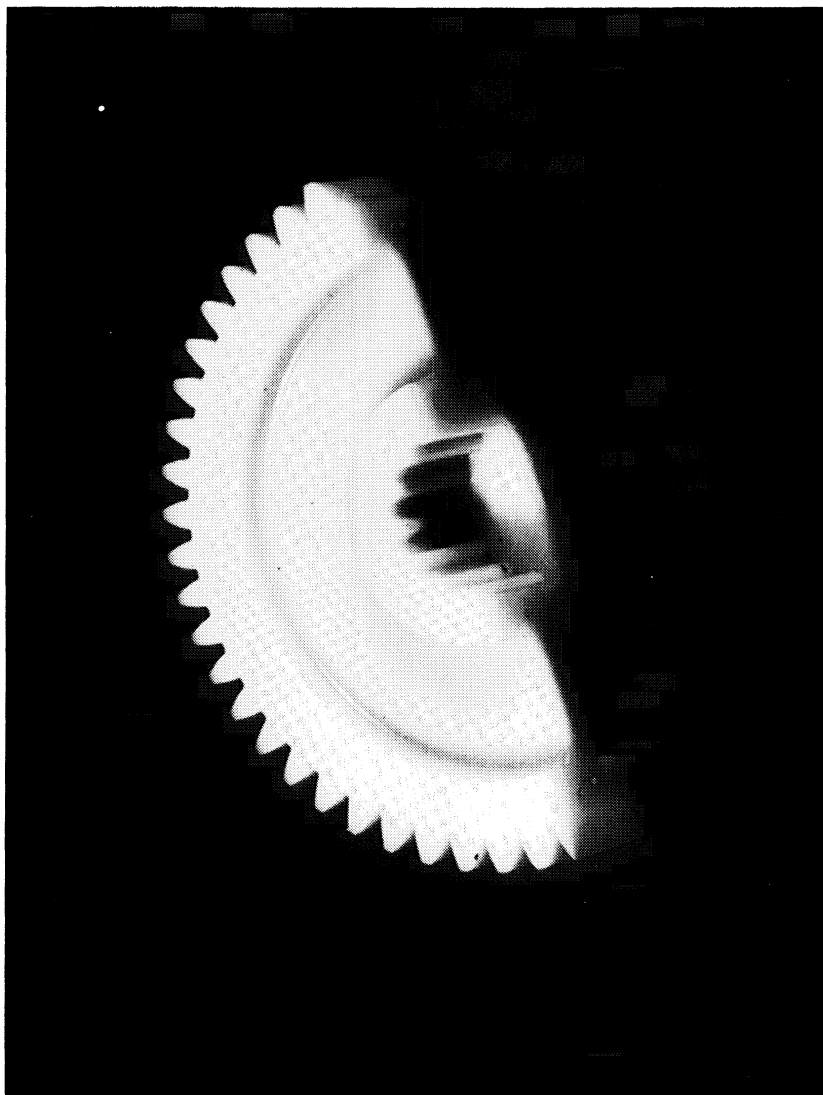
Molded Gear, Sectioned to Show Ring Gate
